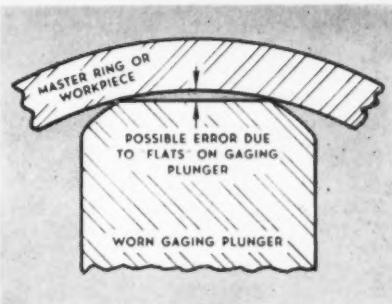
Any flats on gaging surfaces of dial bore gage will cause an error in setting.
